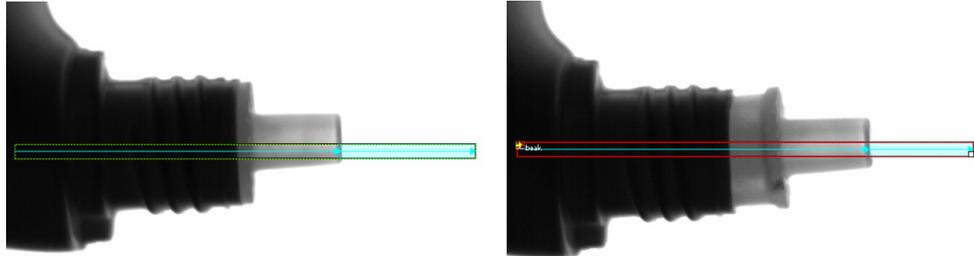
Position checking of the spout of a dish liquid bottle: OK
